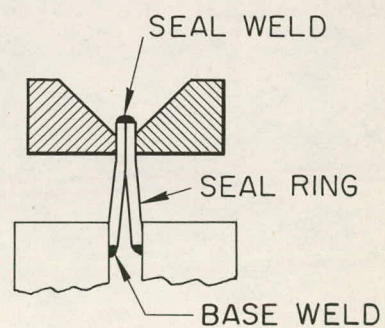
Outside Base Welding on FIG Facility.
